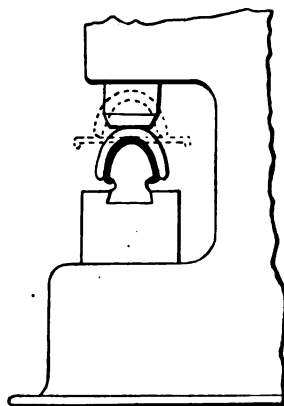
BENDING WITH DIE UNDER THE HAMMER.
